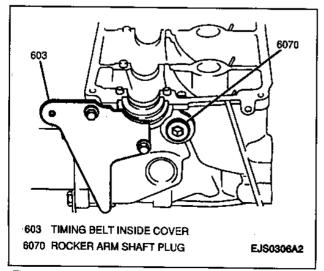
Rocker Arm Shaft Plug and Timing Belt Inside Cover
